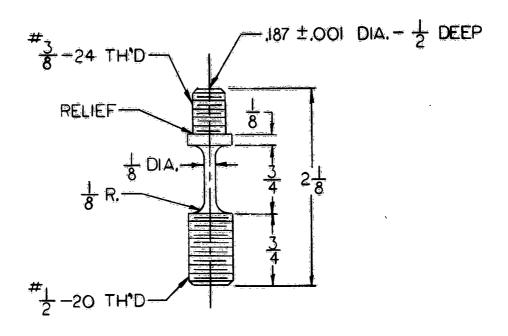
Modified Design of Torsional Fatigue Specimen.
